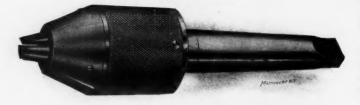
Coit's Ball-bearing Drill Chuck, made by the Standard Machinery Co., Mystic, Conn.
